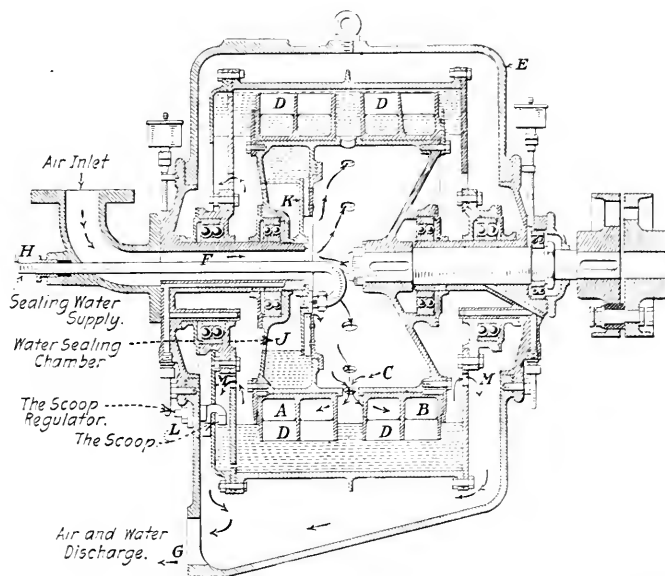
GLOBE-JOHNSTON ROTARY VACUUM PUMP IN SECTION
